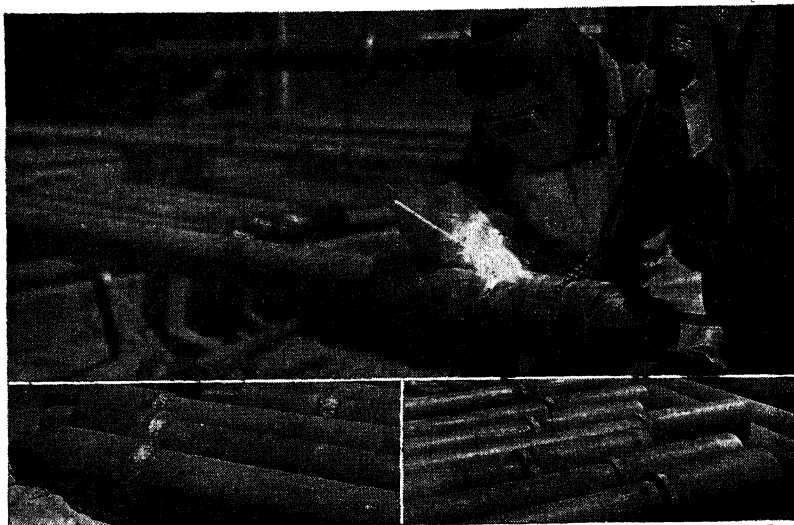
Welding pin end of standard A.P.I. joint. Left below: Completed pin end joints. Right below: Completed box end joints.
